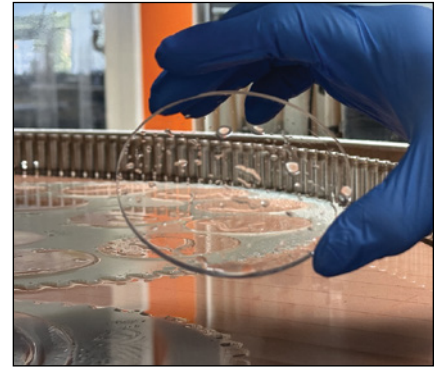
The double-polished circular part is carefully removed from the DSP machine to be cleaned and inspected.
